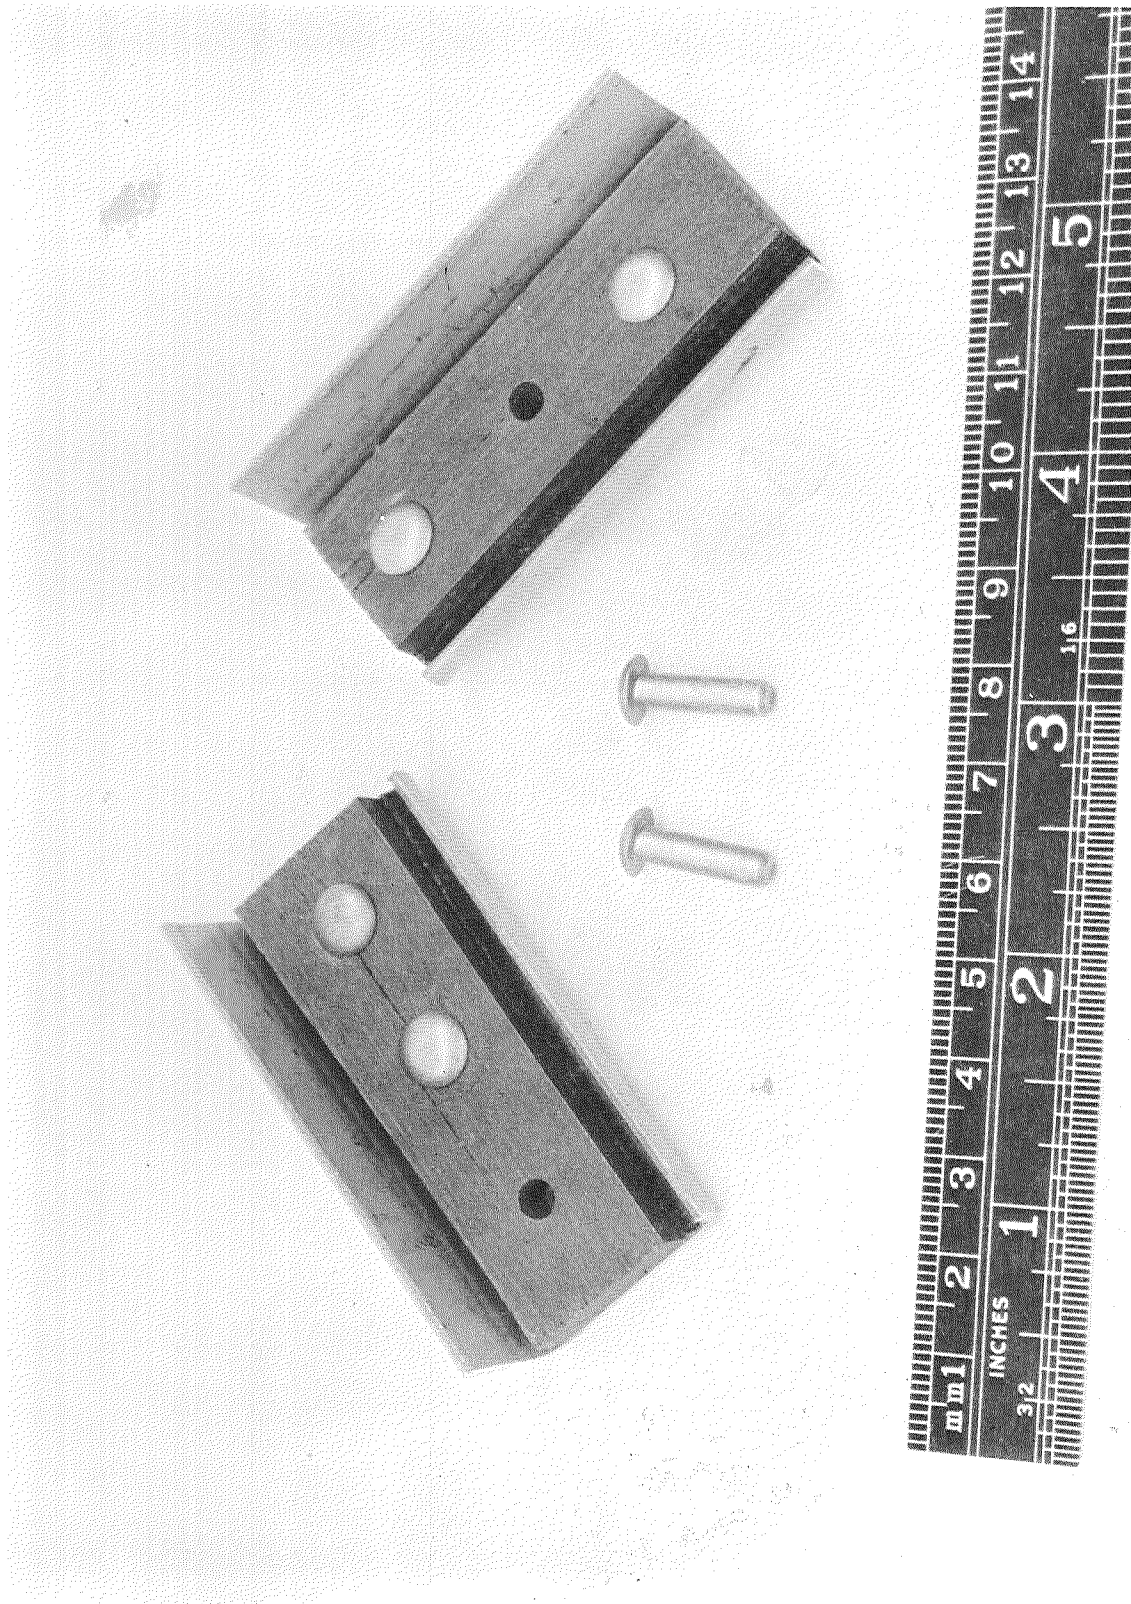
BORON/EPOXY RIVETED SPECIMENS.
